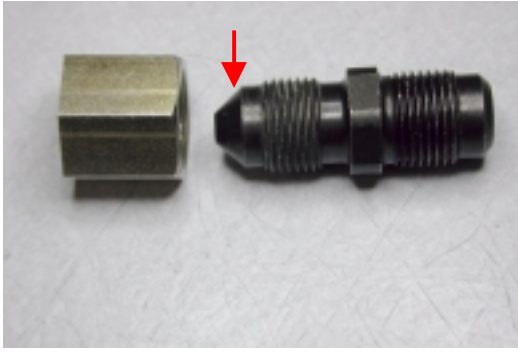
Photo of unassembled nut and threadsaver (tube not present). Note steep angle of mating surface, at arrow.
